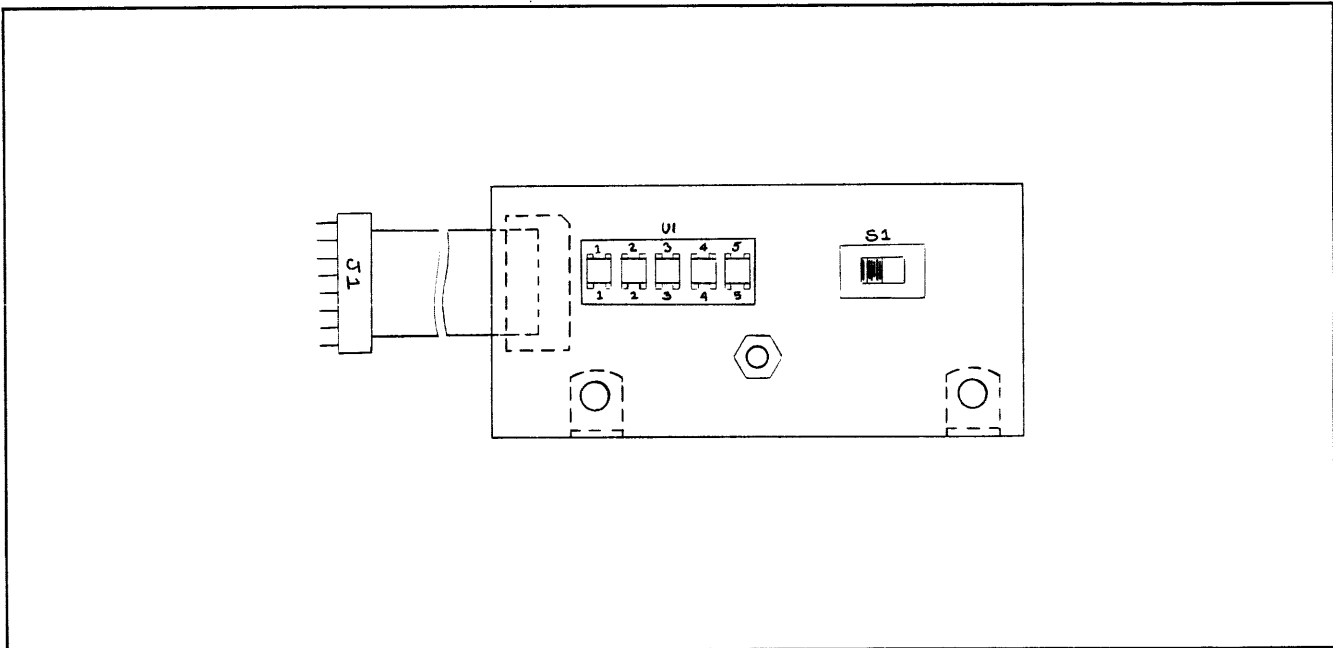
A18 IEEE-488-1975 Switch PCB Assembly
